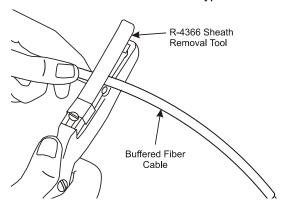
R-4366 Sheath Removal Tool–Ring-Cut Cable Jacket
